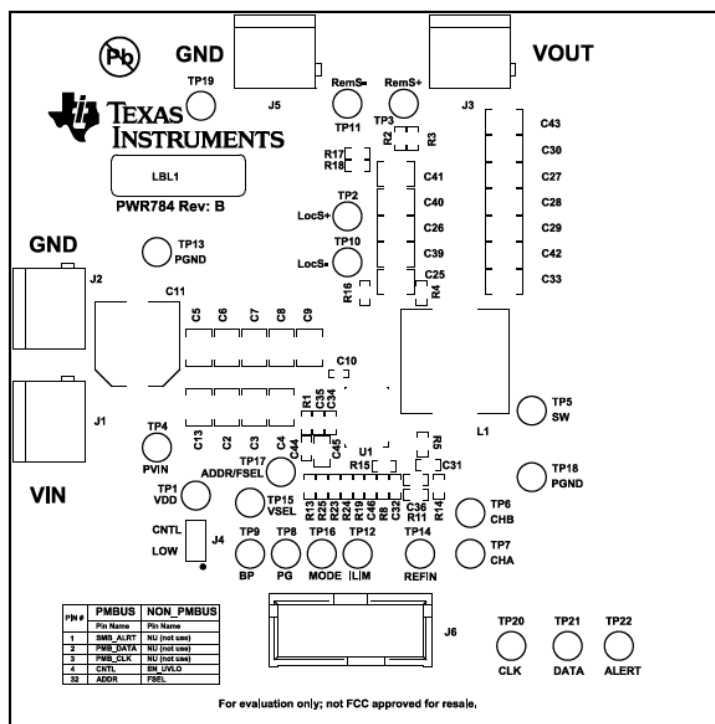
PWR-784EVM Top Layer Assembly Drawing (Top View)
